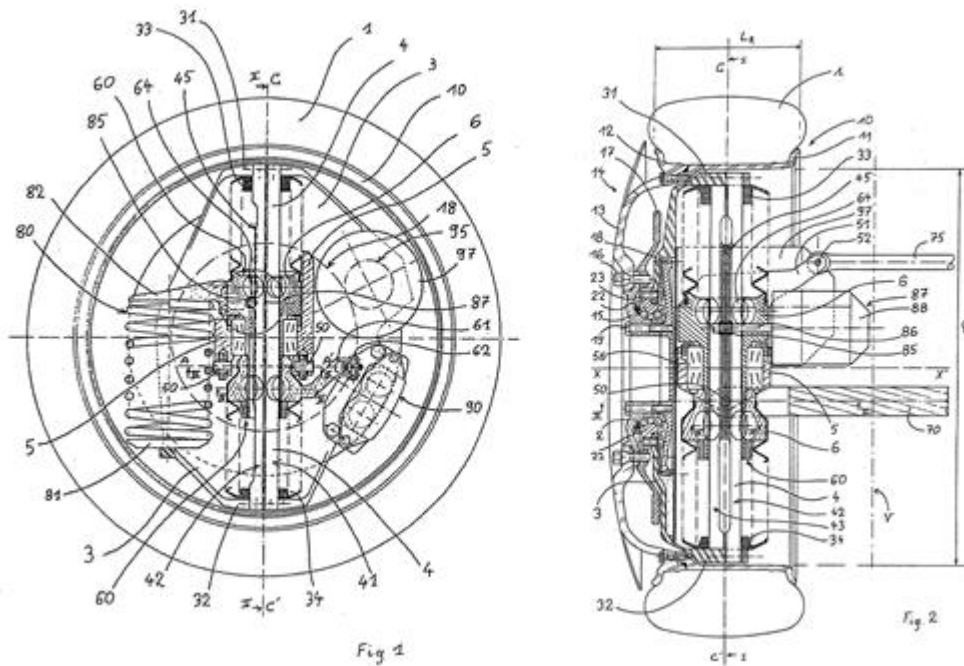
Wheel assembly a suspension integrated in the wheel hub [8]
